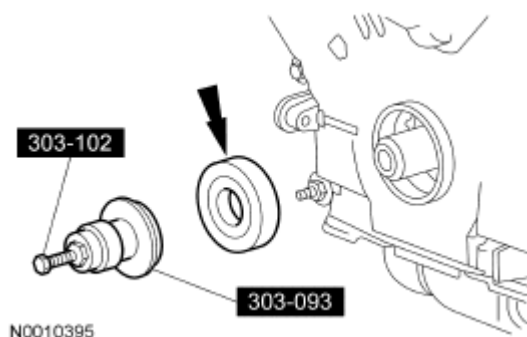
Identifying Crankshaft Front Seal And Special Tools
